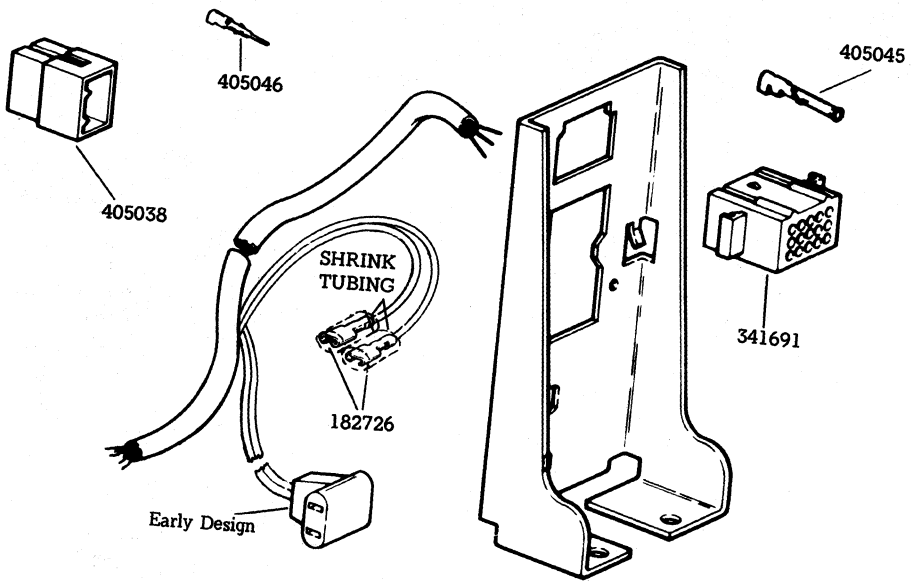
AC Cable Assembly - Tractor Feed Printer Cabinet
